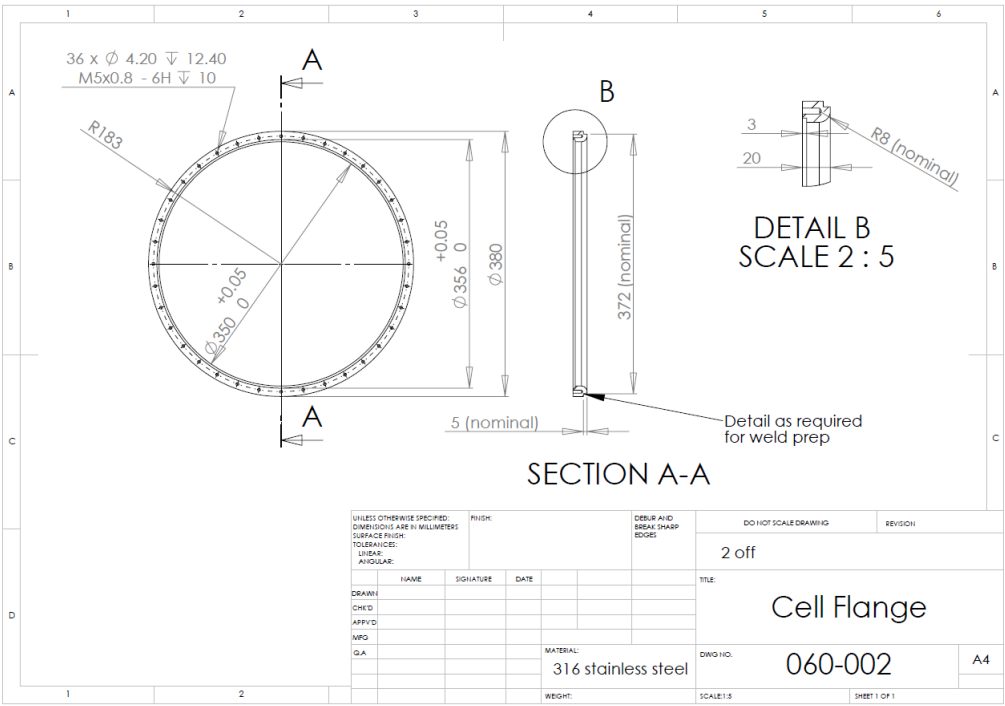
Drawing of the vacuum flanges for the indium seal, was welded onto the chamber walls.
